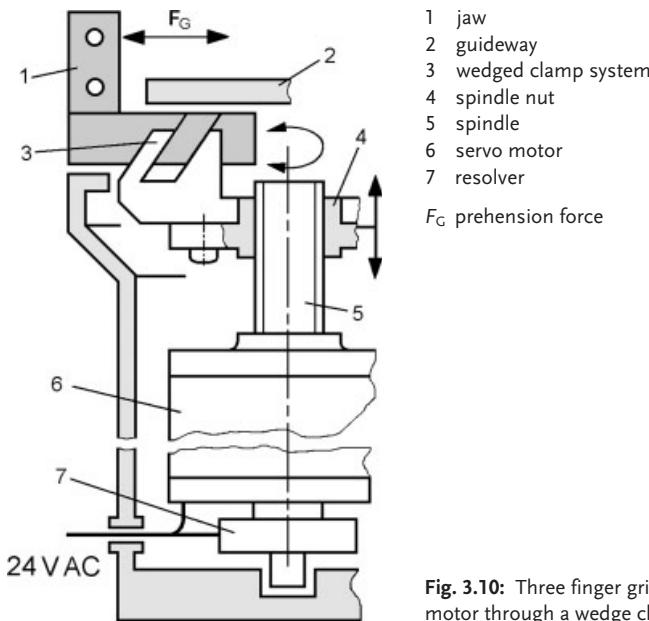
Three finger gripper driven by an electric motor through a wedge clamp gear
